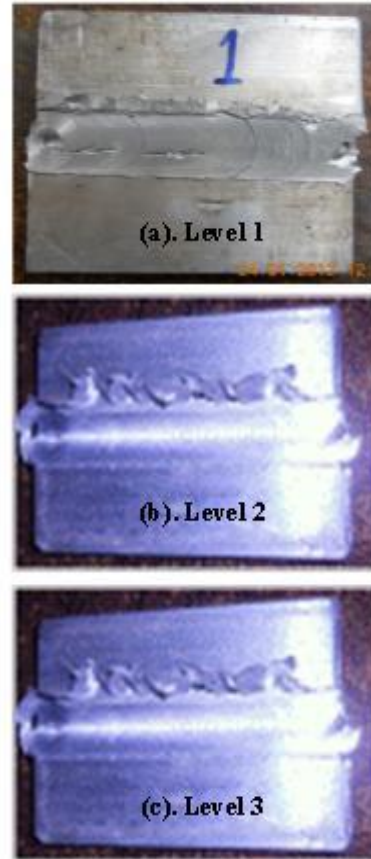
FSW Butt Welded Aluminium Plates.
